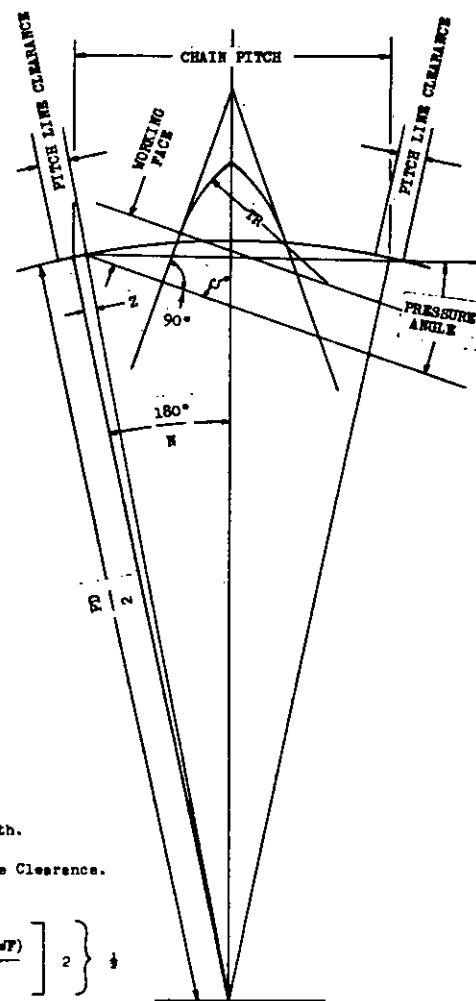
SHOWING TECHNICAL ELEMENTS FOR OUTSIDE DIAMETER
